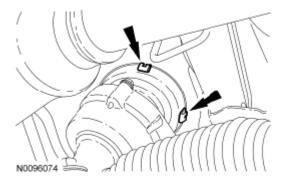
Locating Steering Gear-To-Dash Seal And Clips Courtesy of FORD MOTOR CO.
